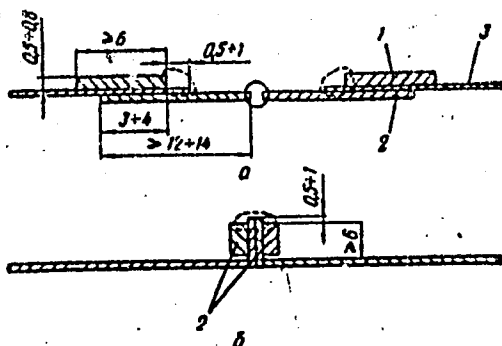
Butt joints of sylphons or thin plates welded with the aid of:
